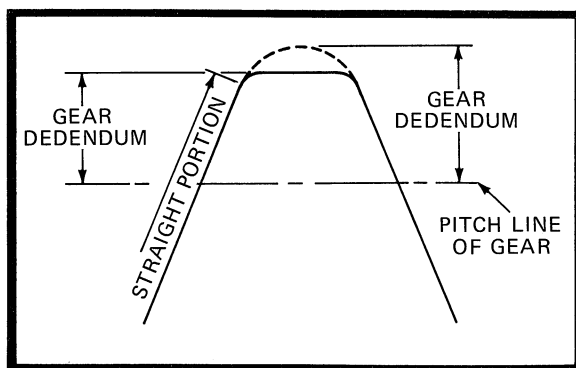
Tooth form of preshaving hob. If full rounded root fillets are desired, additional whole depth becomes necessary.
